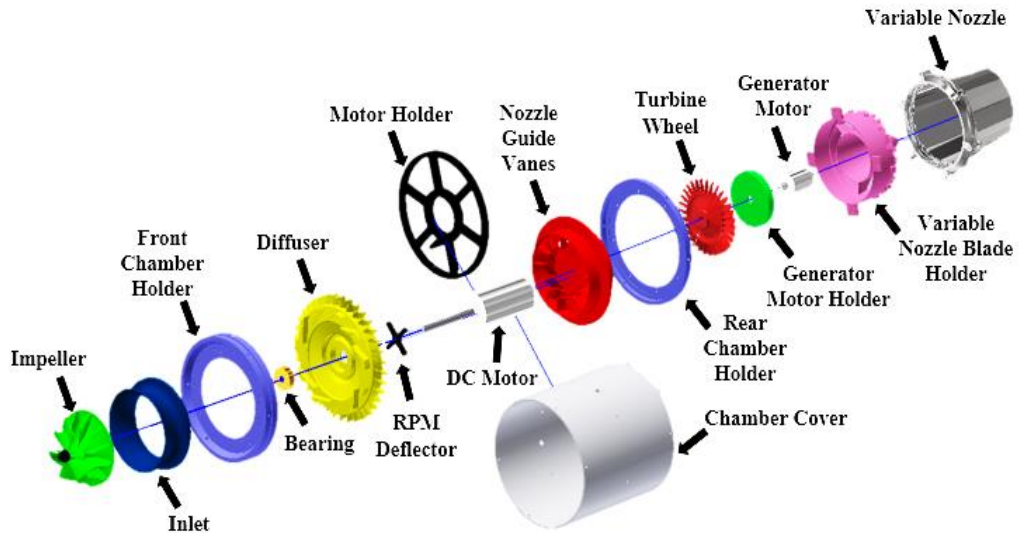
Exploded View of the Proposed Micro Jet Assembly
